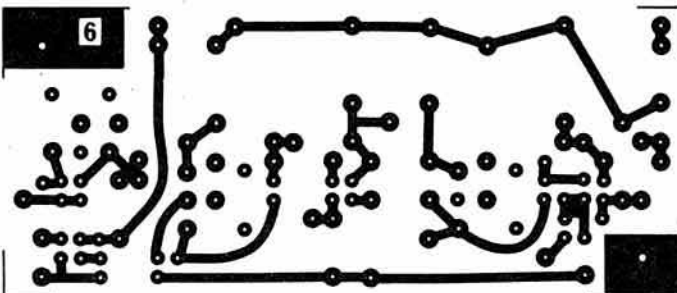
Etching pattern for the wiring side of the i.f. amplifier/product detector board (PCB6). This pcb uses double-sided board material, the other side being used as a groundplane
